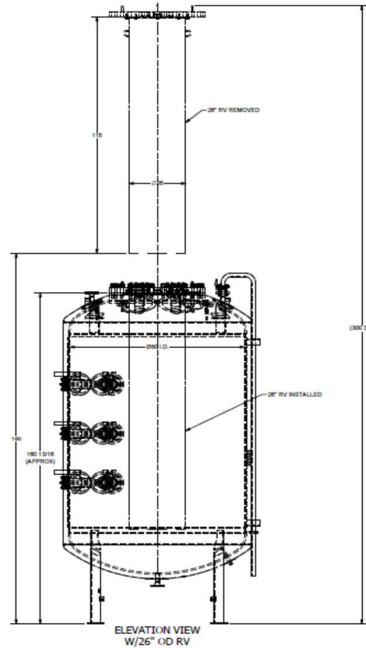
iPWR Containment Structure with Reactor Vessel Cylindrical Inserts [94].
